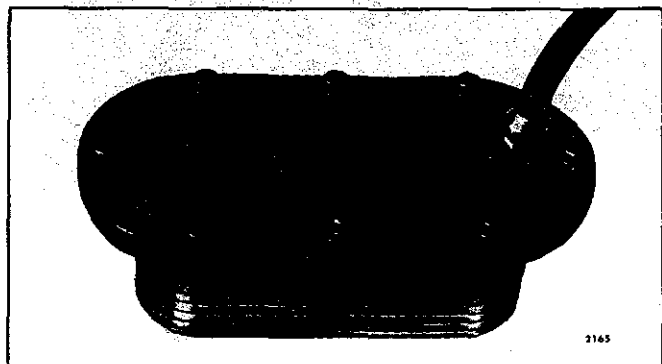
Preparing Oil Cooler Core for Pressure Test
